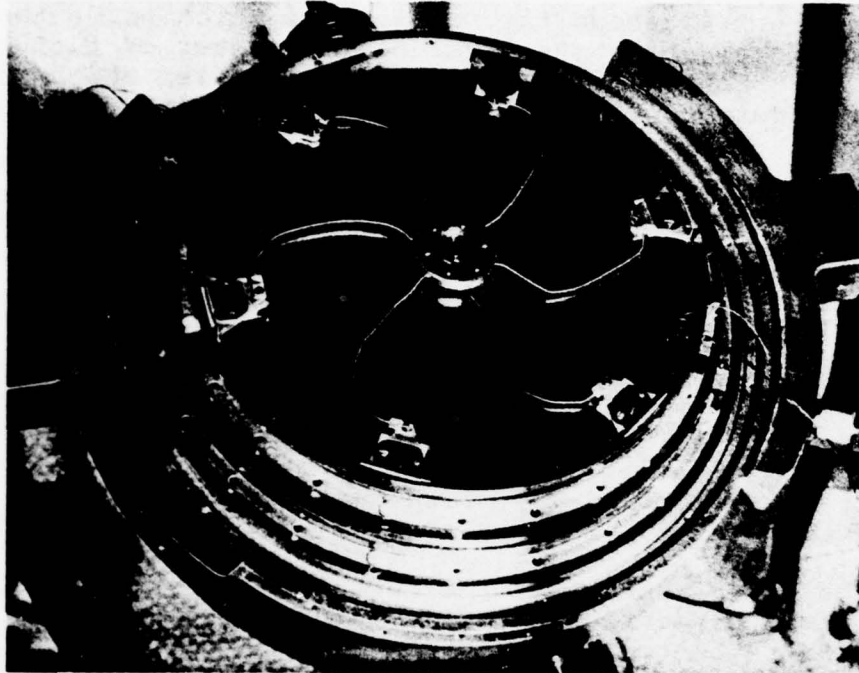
Cover of First Magnetic Shield and Lower Section of Degaussing Circuit Added to Assembly
